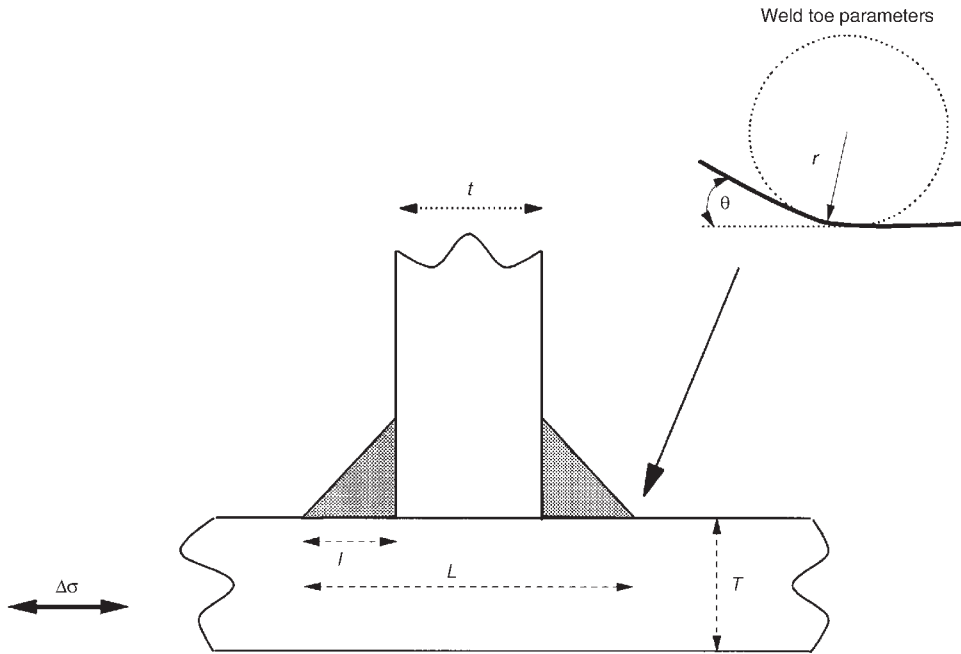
Geometry parameters that affect weld toe stress concentration. r , weld toe root radius; θ , weld angle; L , toe-to-toe weld length. Source: Ref 16
